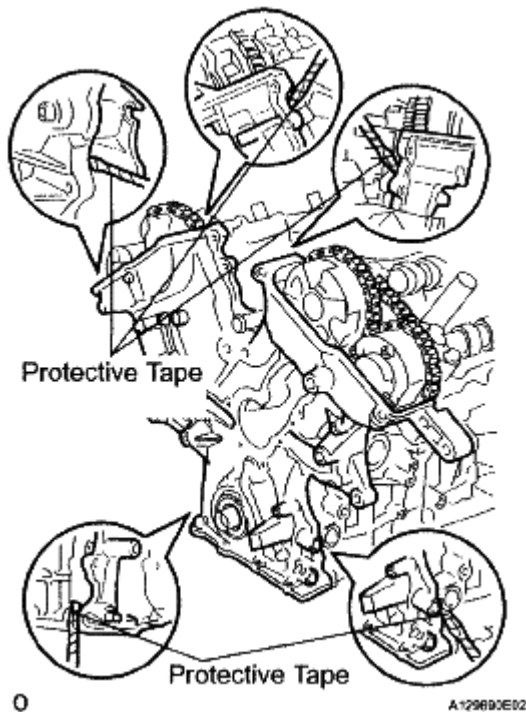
Prying Between Timing Chain Cover & Cylinder Head Or Cylinder Block With Screwdriver
